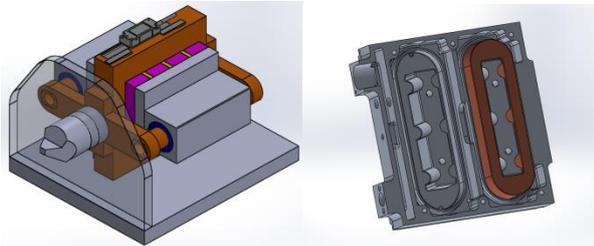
Schematic design of FTS with air bearings and a linear motor composed by two coils and permanent magnets.
